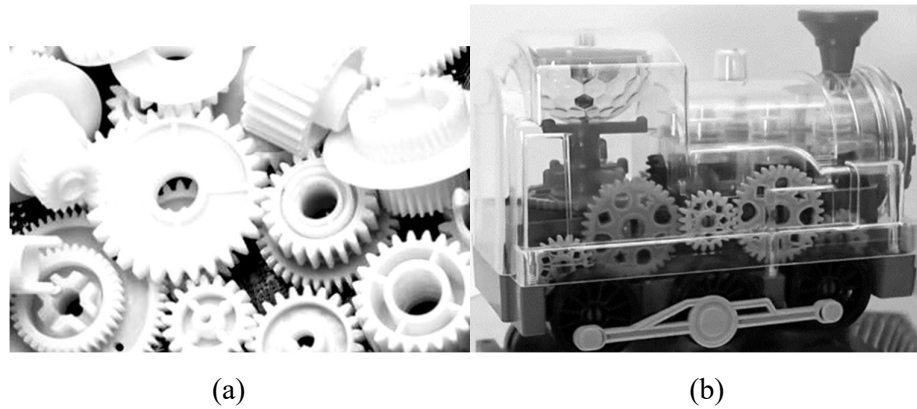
(a) Plastic Moulded gears[10] (b) gears used in a toy train[11]
